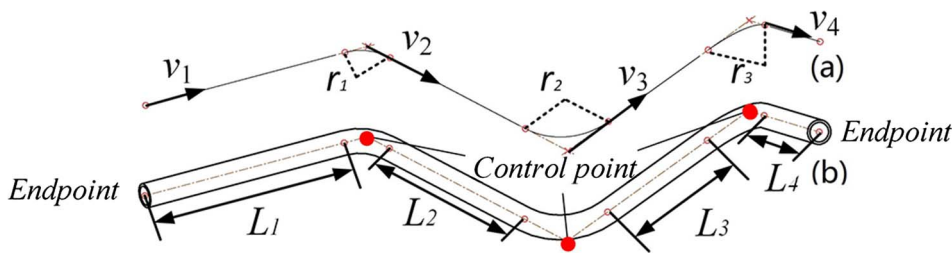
Bend tube measurements: (a) center line and (b) 2D projection of the tube.
